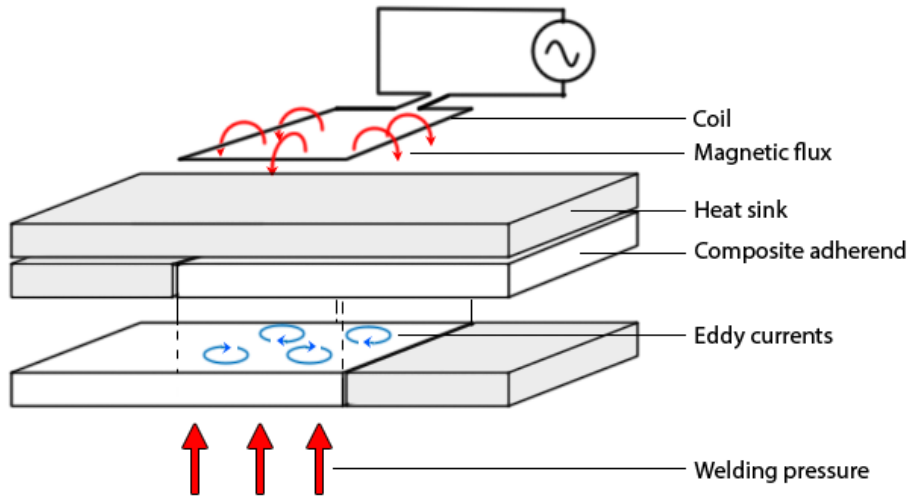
Experimental set-up induction welding without susceptor
